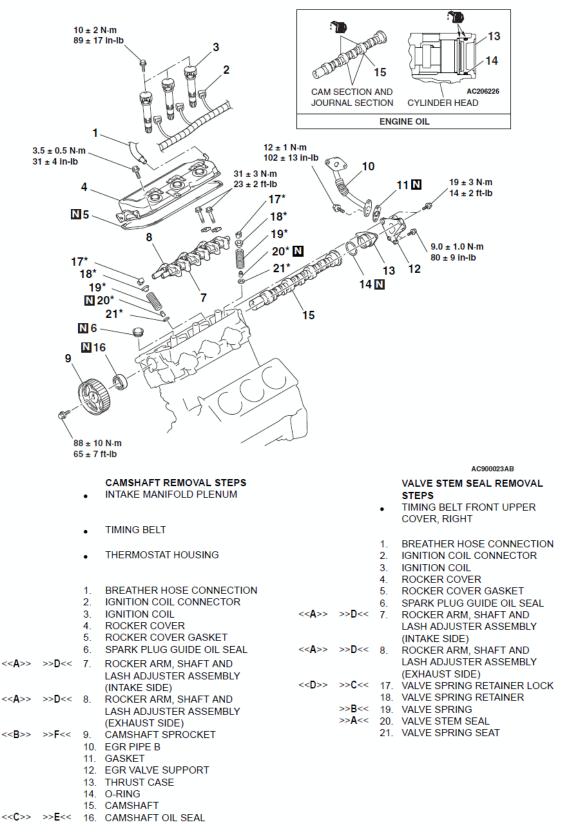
Camshaft And Valve Stem Seal Components With Torque Specifications (Right Bank) Courtesy of MITSUBISHI MOTOR SALES OF AMERICA.
